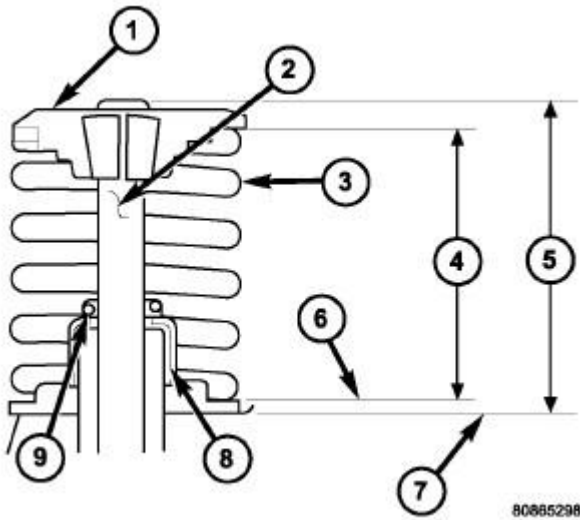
Valve Tip Height & Valve Spring Installed Height
